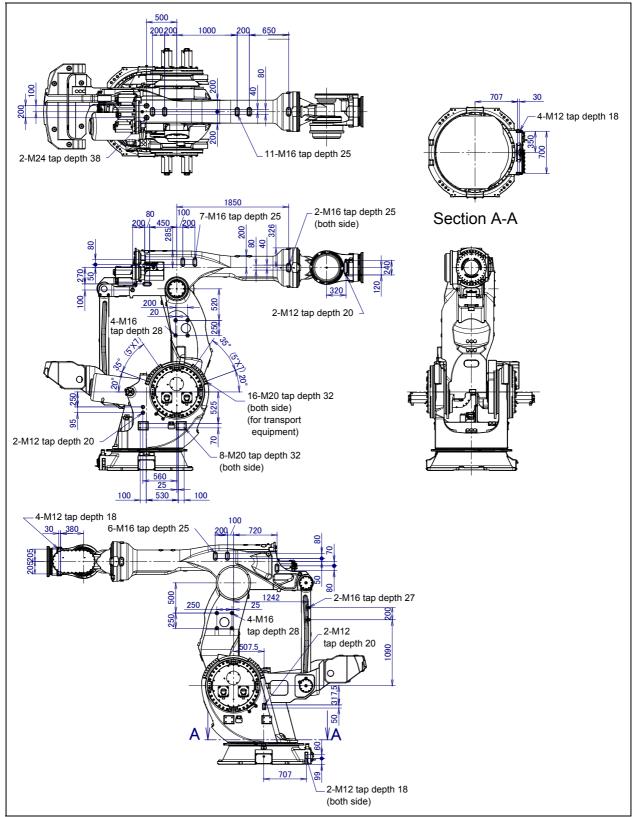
(d) Equipment mounting faces (M-2000iA/1700L)
